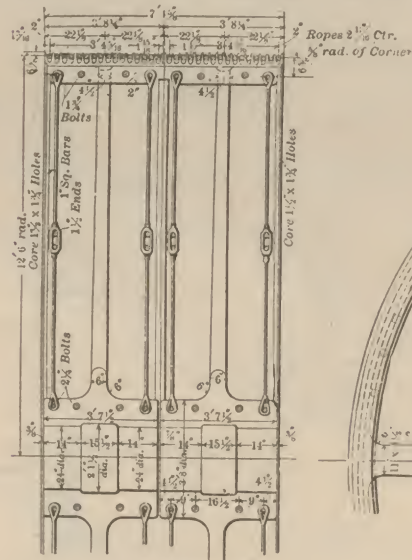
PRINCIPAL DETAILS OF WHEEL.
